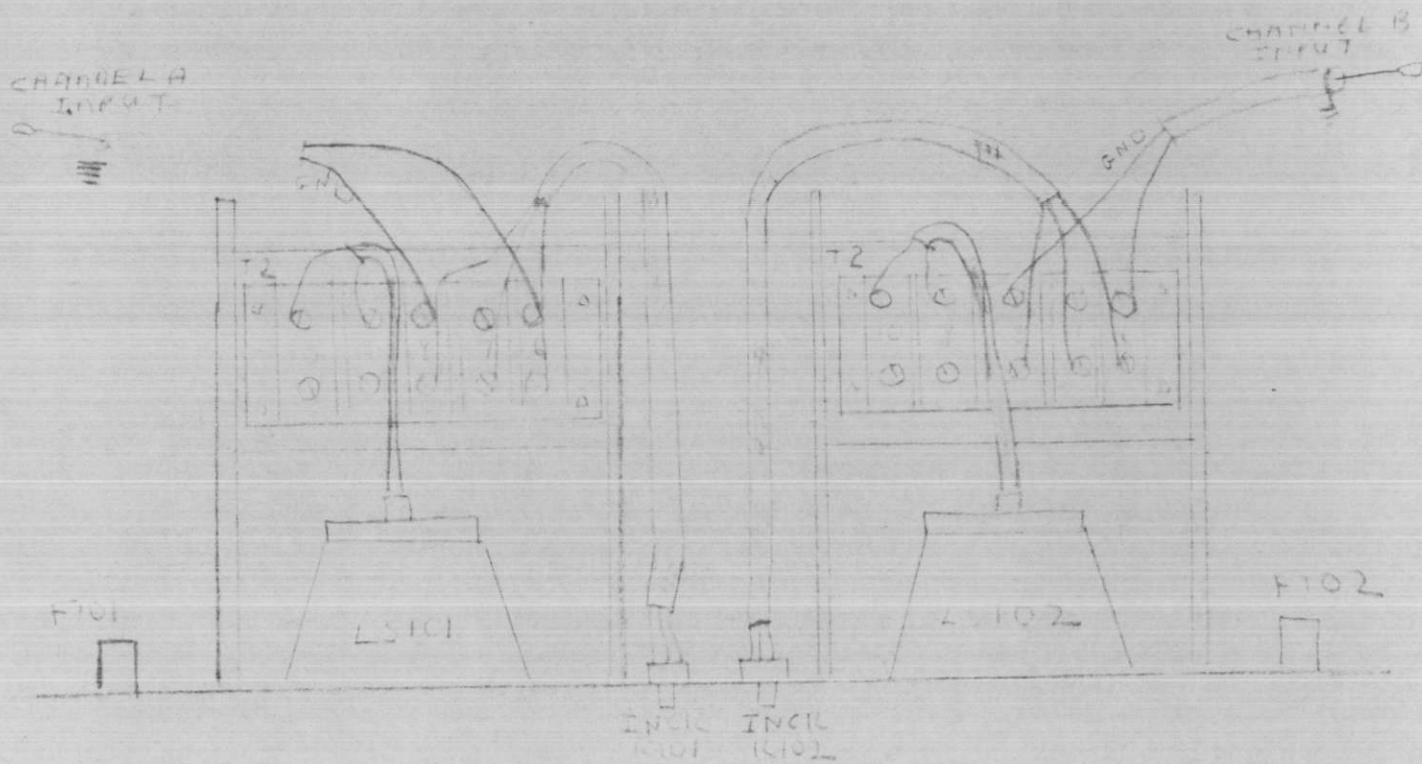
BSP-2, BOTTOM VIEW SHOWING CONNECTIONS
